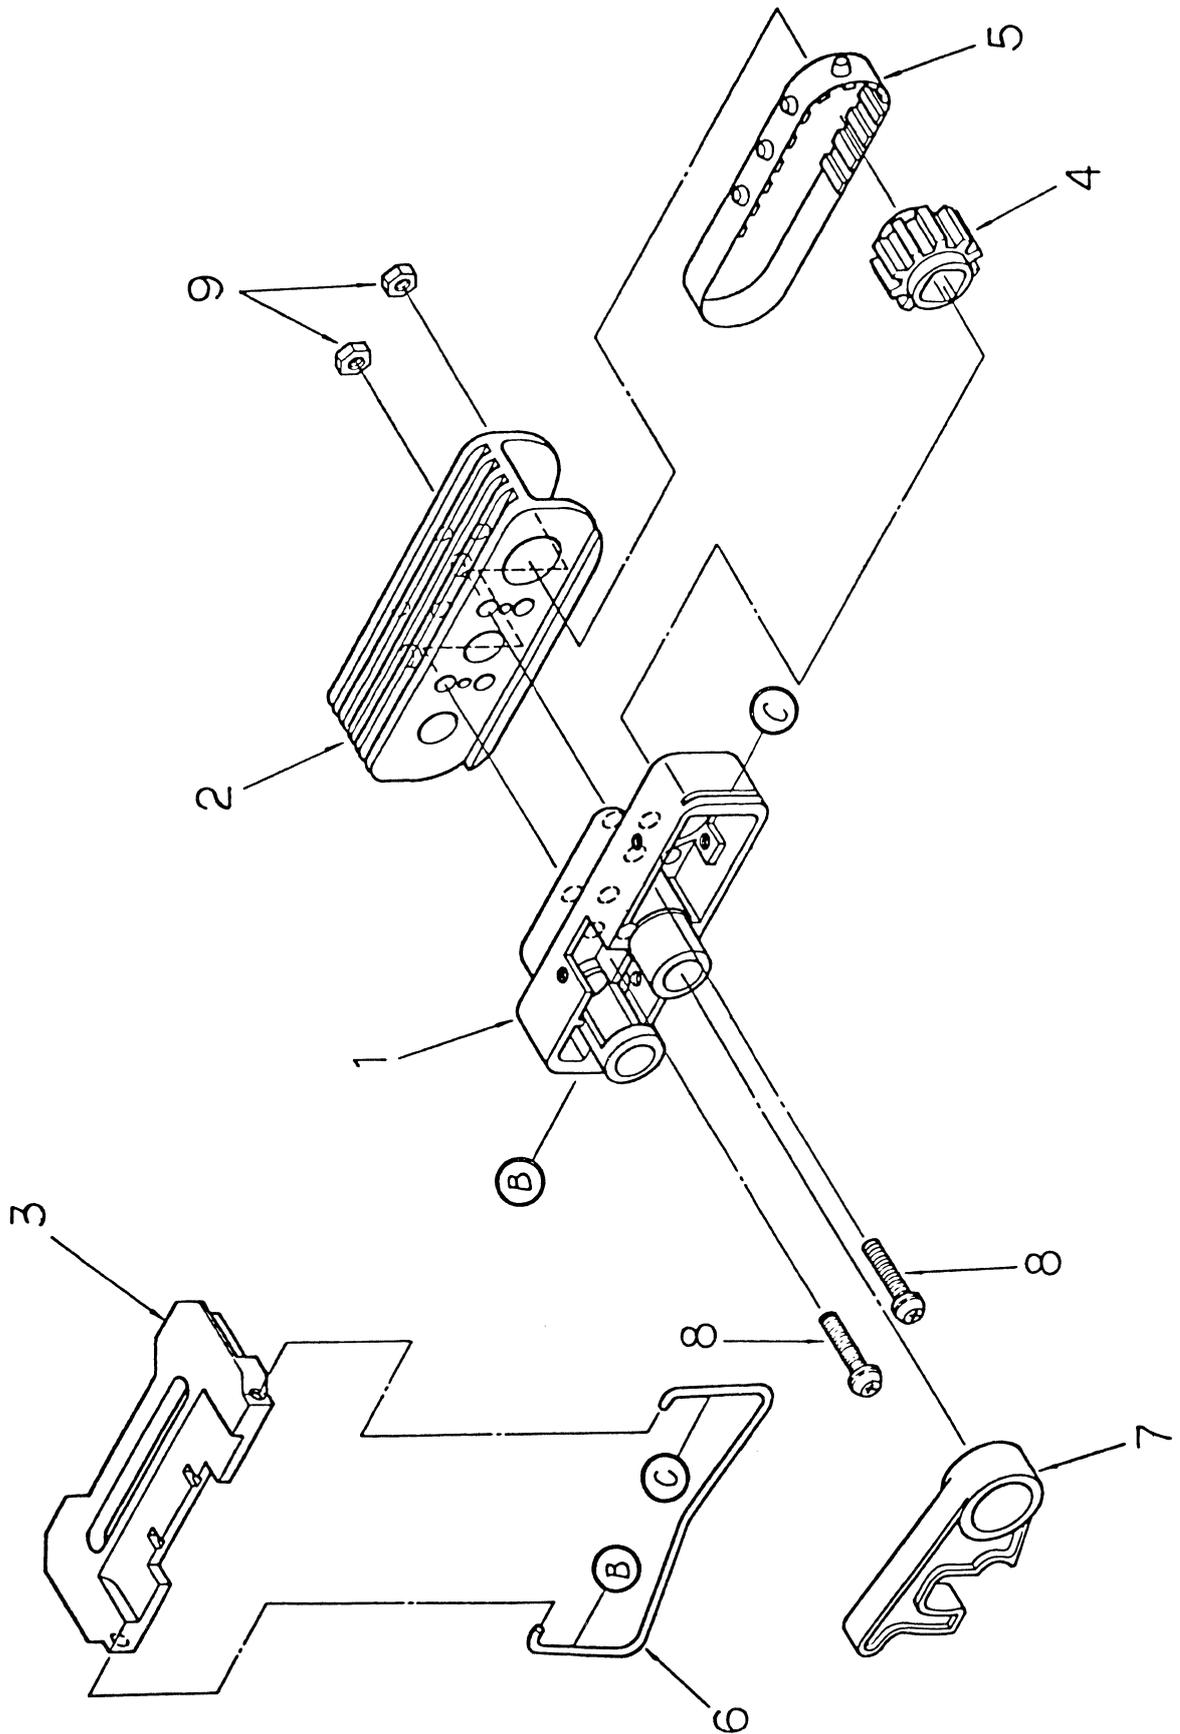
Sprocket Assembly (L) (FMX-35150-2)
